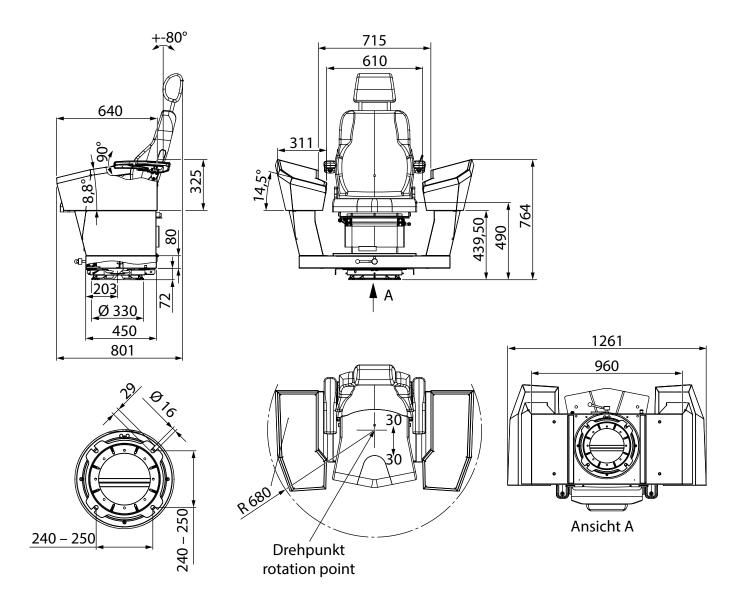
Control stand SV1C Premium-Line: Dimension drawing 1 (dimensions in mm)
